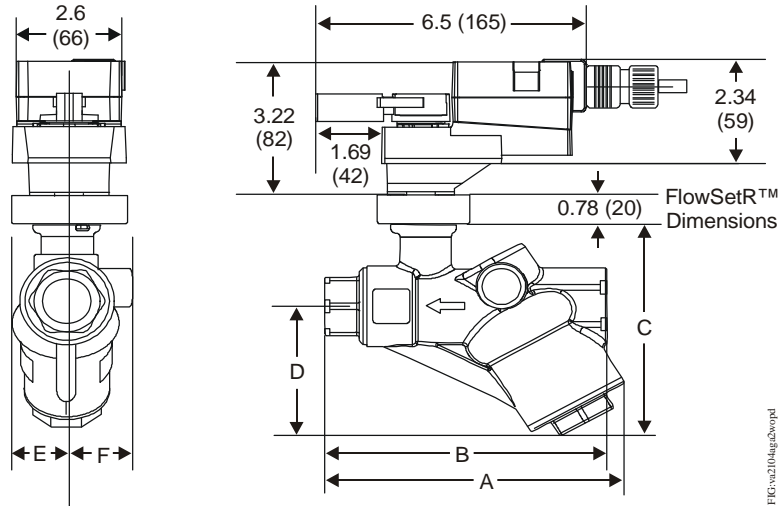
VA2104-AGA-2 Actuated P1000 Valve without Pressure Taps Dimensions, in. (mm)
